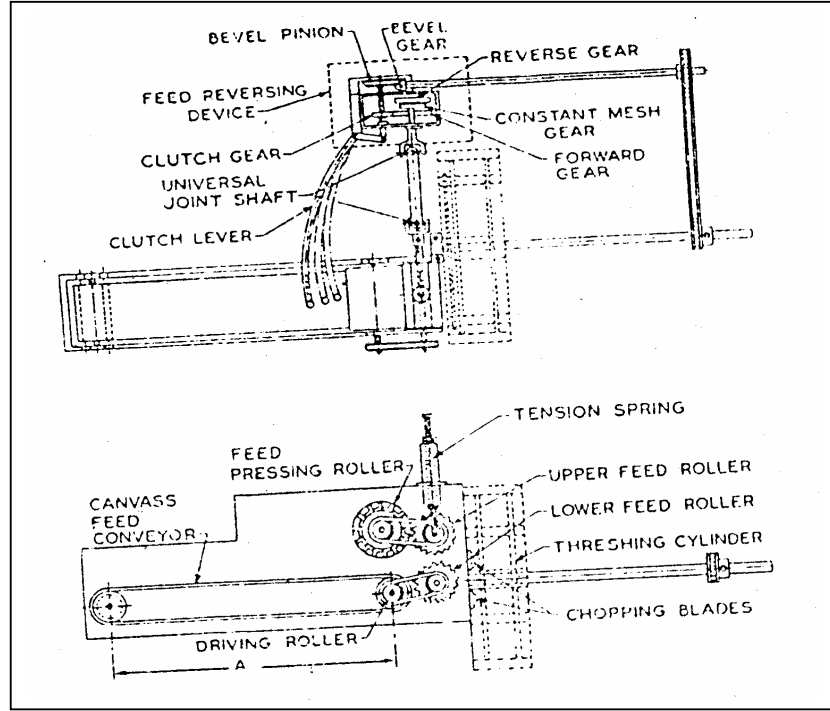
FEED REVERSING DEVICE FOR CHAFF-CUTTER TYPE THRESHERS
